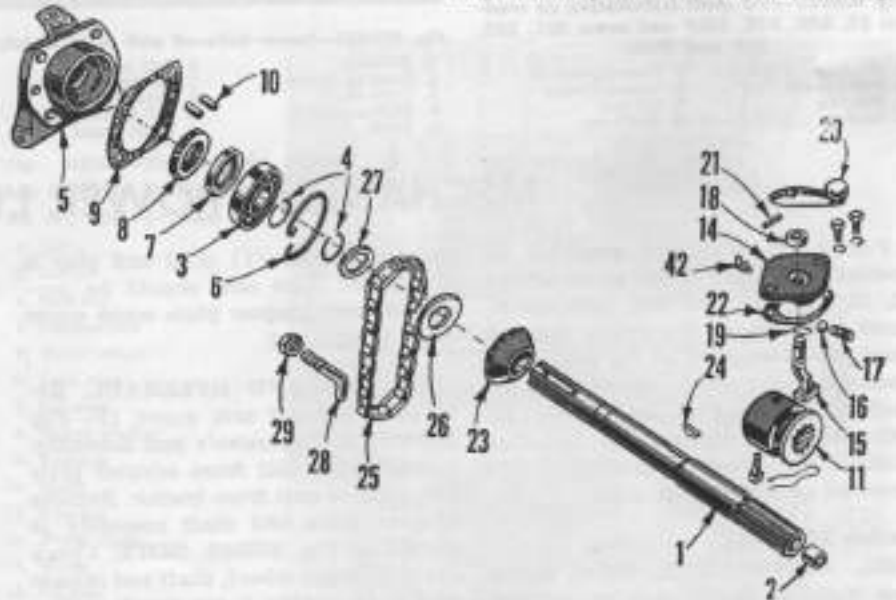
Exploded view of power take-off unit as used on models 20, 20K, 22, 22K, 81 and 82. Bevel gear (23) is used only on models 20K, 81 and 82 which are equipped with mechanical lift.
